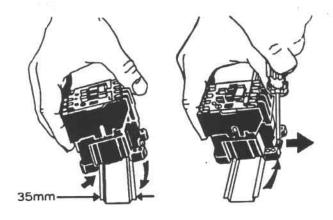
FIGURE VII-J: METHOD OF CONTACTOR REMOVAL
